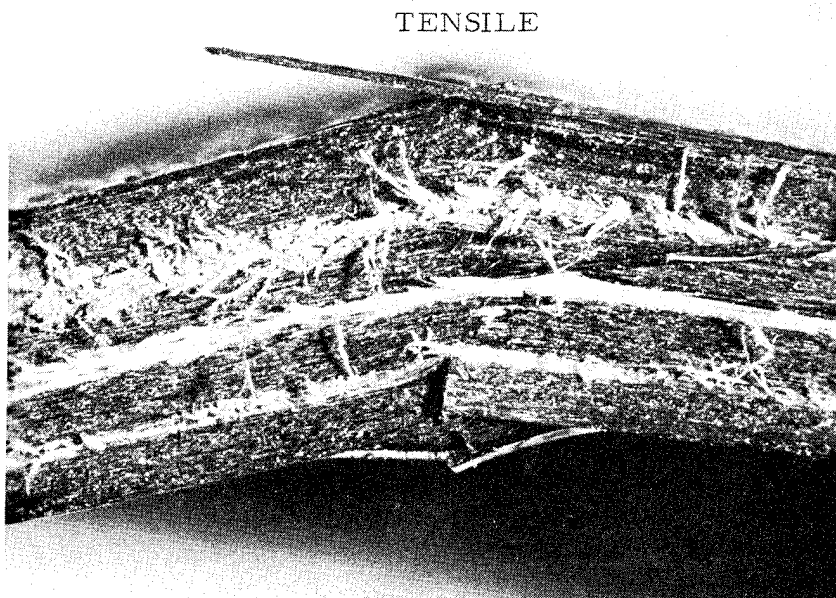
18X EDGE-VIEW OF IMPACT FRACTURE AREA OF PANEL
